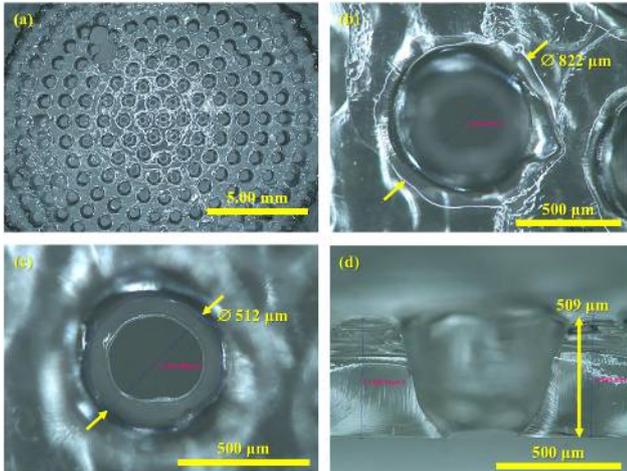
Photographs of the patterned curved film: (a) top view of the hole pattern, (b, c) enlarged view of a pillar-shaped hole focused on the top and bottom, respectively, and (d) cross-sectional image.
